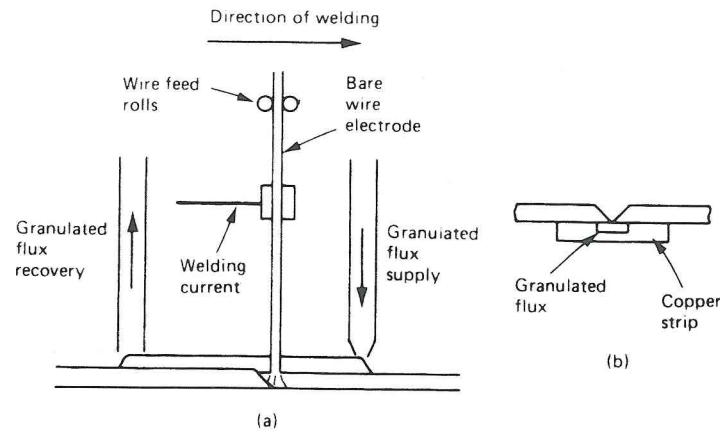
(a) Submerged arc welding; (b) backing plate arrangement for one-sided welding
